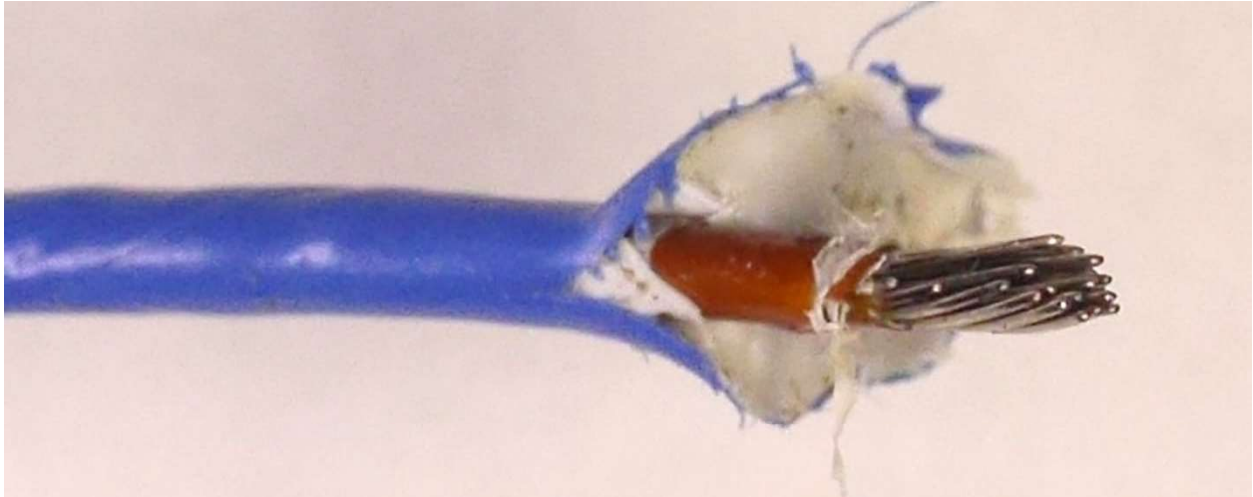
RMLG blue wire fractured end showing necking and ductile overload
